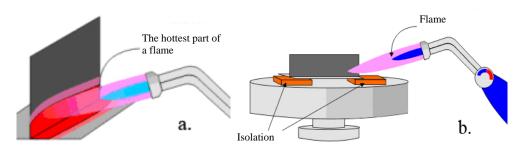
Torch brazing preparation: a. heating parts; b. parts position.
